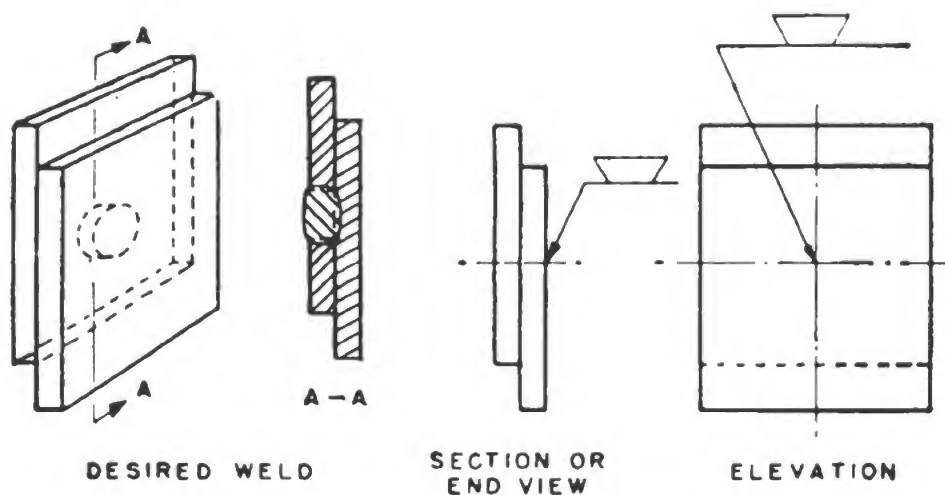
Use of other-side plug welding symbol.
